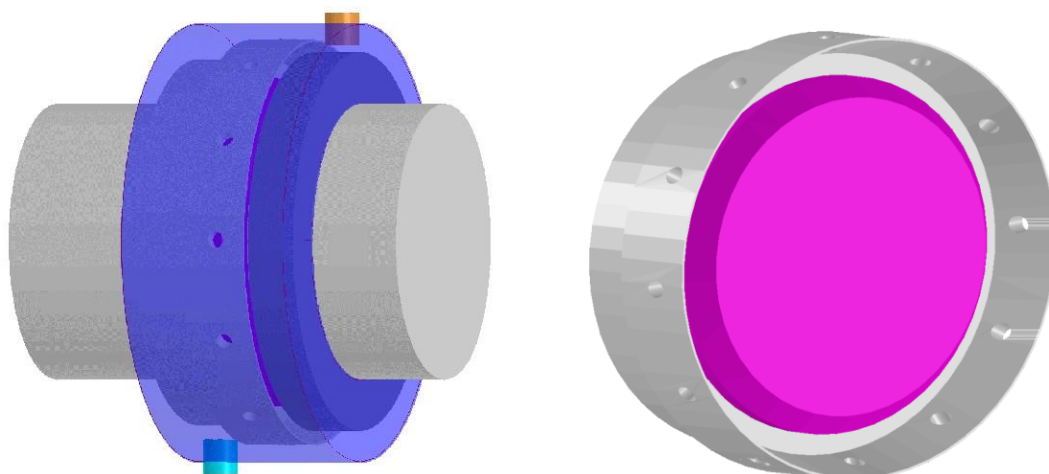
Pumping Ring with seal system Figure 2. Geometry of Pumping and Mating Rings
